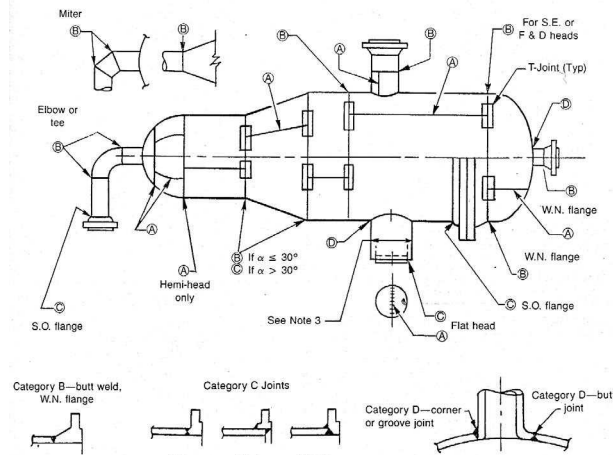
Categories of welded joints in a pressure vessel.
